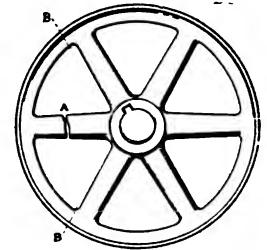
PREHEATING OFTEN REMOVES THE NECESSITY OF GROOVING, AS IN THE CASE OF A CRACKED SPOKE IN A WHEEL. HEATING THE RIM AT POINTS B-B OPENS THE CRACK AT A ENOUGH TO ALLOW THE WELDING TO BE CARRIED THROUGH THE SPOKE
